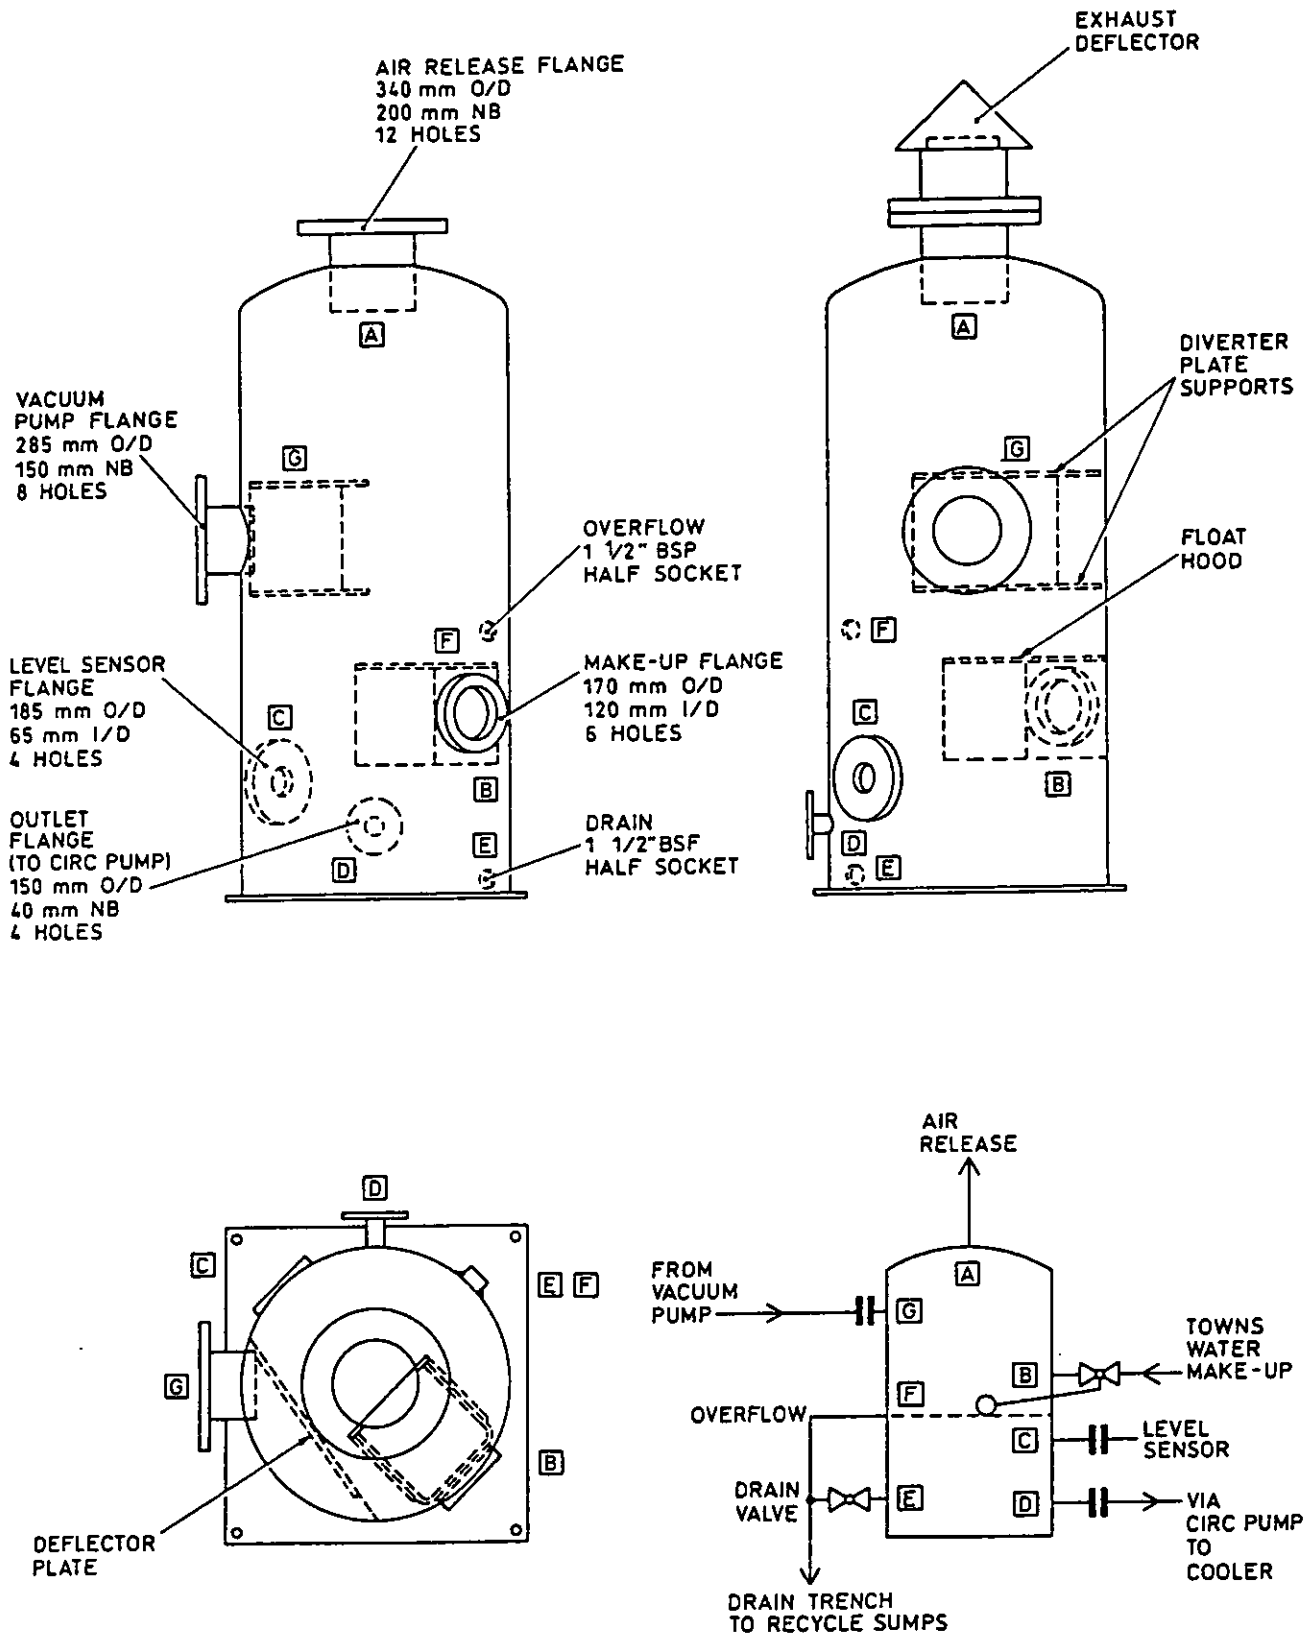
SEAL WATER AIR SEPARATOR - ARRANGEMENT
